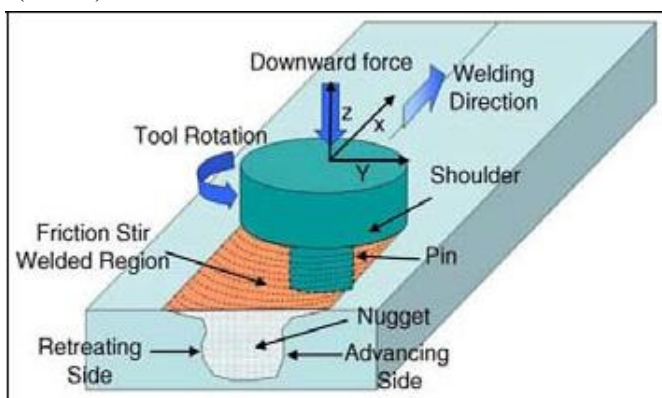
Schematic Diagram of Friction Stir Welding With a Rotating Tool
